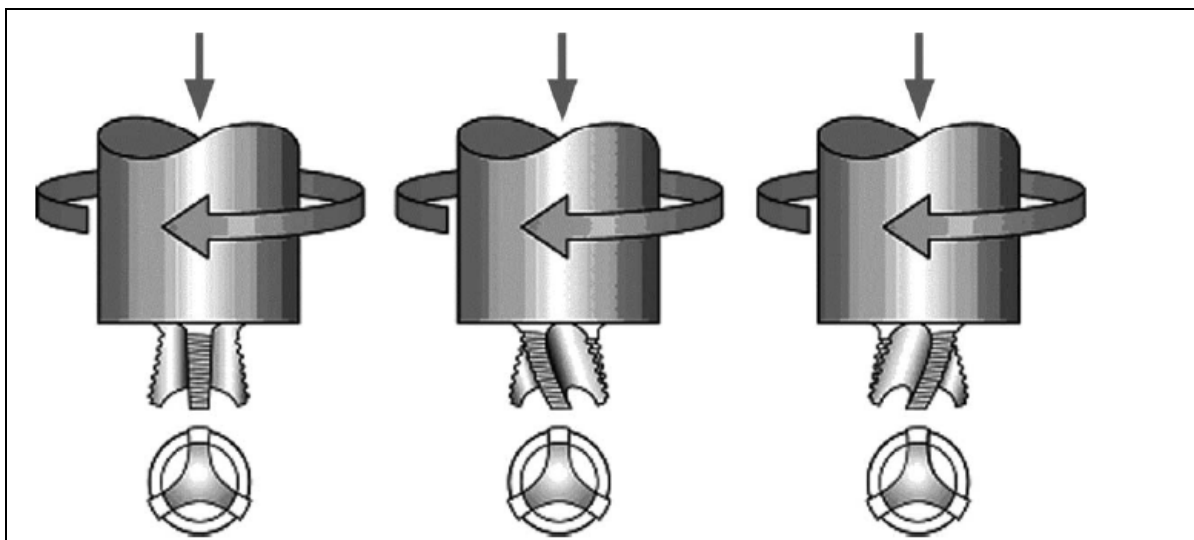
Flared-Triflute™ tool pin geometries developed by the welding institute, (a) neutral flutes, (b) left flutes and (c) right hand flutes.
